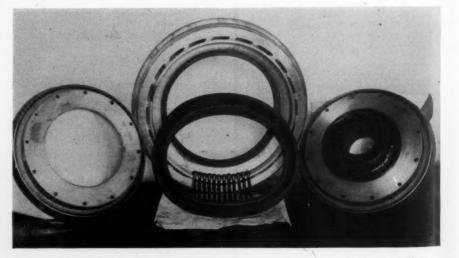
Disassembled parts of new type wheel. Center rear, cast steel tire; left and right, steel retainer castings; center, rubber insulators. In assembling, rubber insulators are inserted one on each side of tire, with hub casting on one side and retainer casting opposite, bolted in place.
